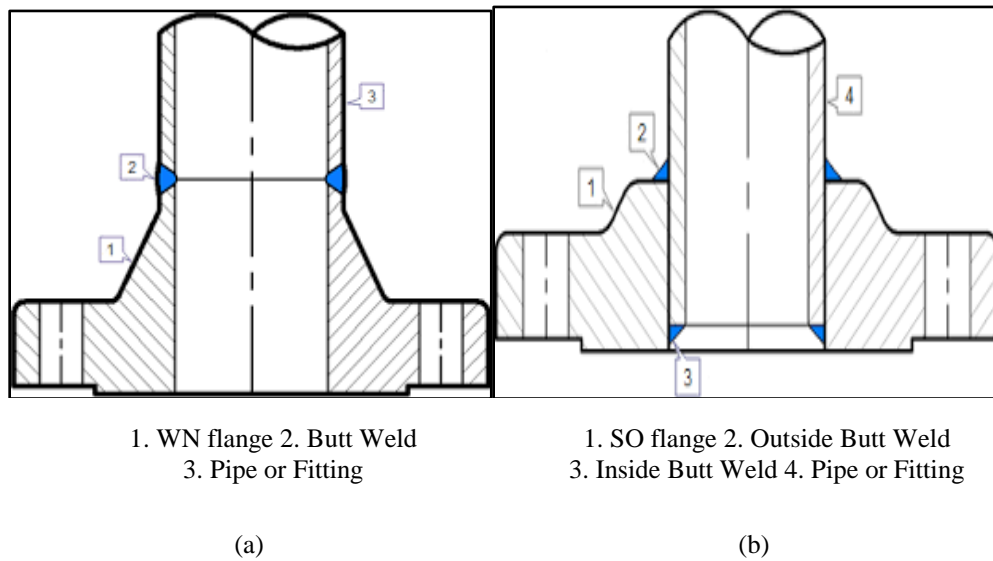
Different Types of Flanges Sketch. (a) Weld-Neck Flange and (b) Slip-On Flanges
